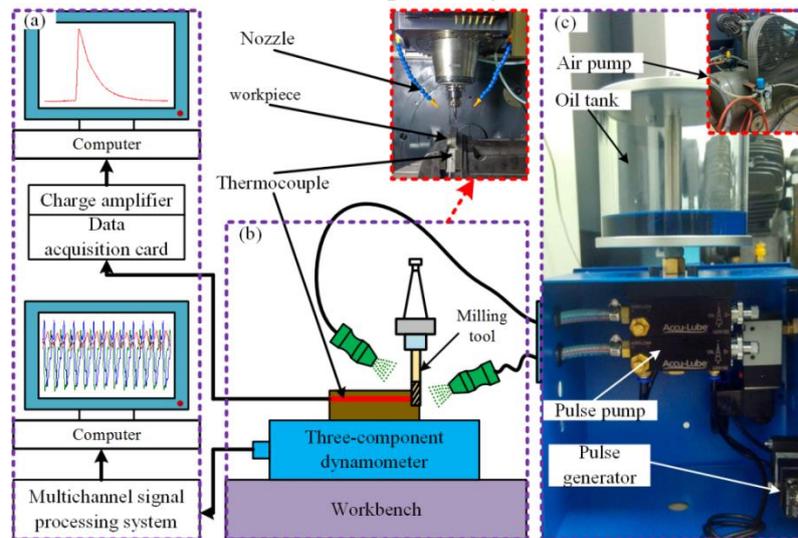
(a) Measurement system, (b) machine tool and (c) MQL system
